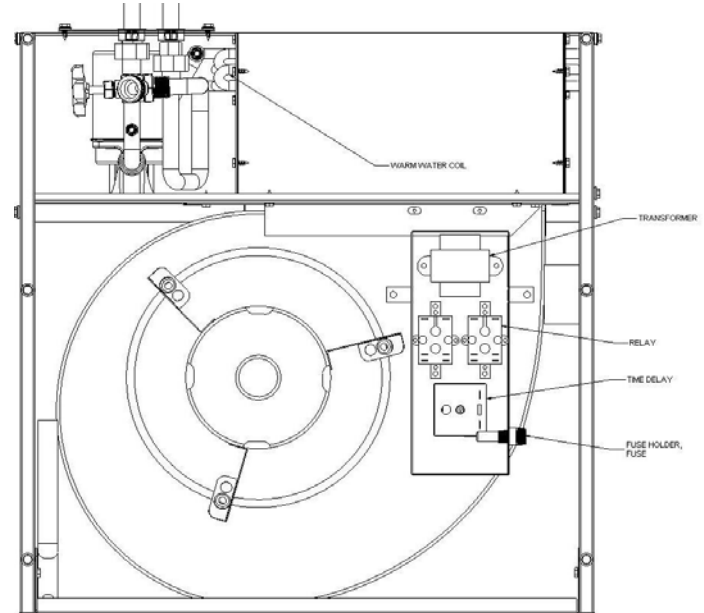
Blower Assembly and Mounting Screw Location – H02 / H03 / WCW-HW
